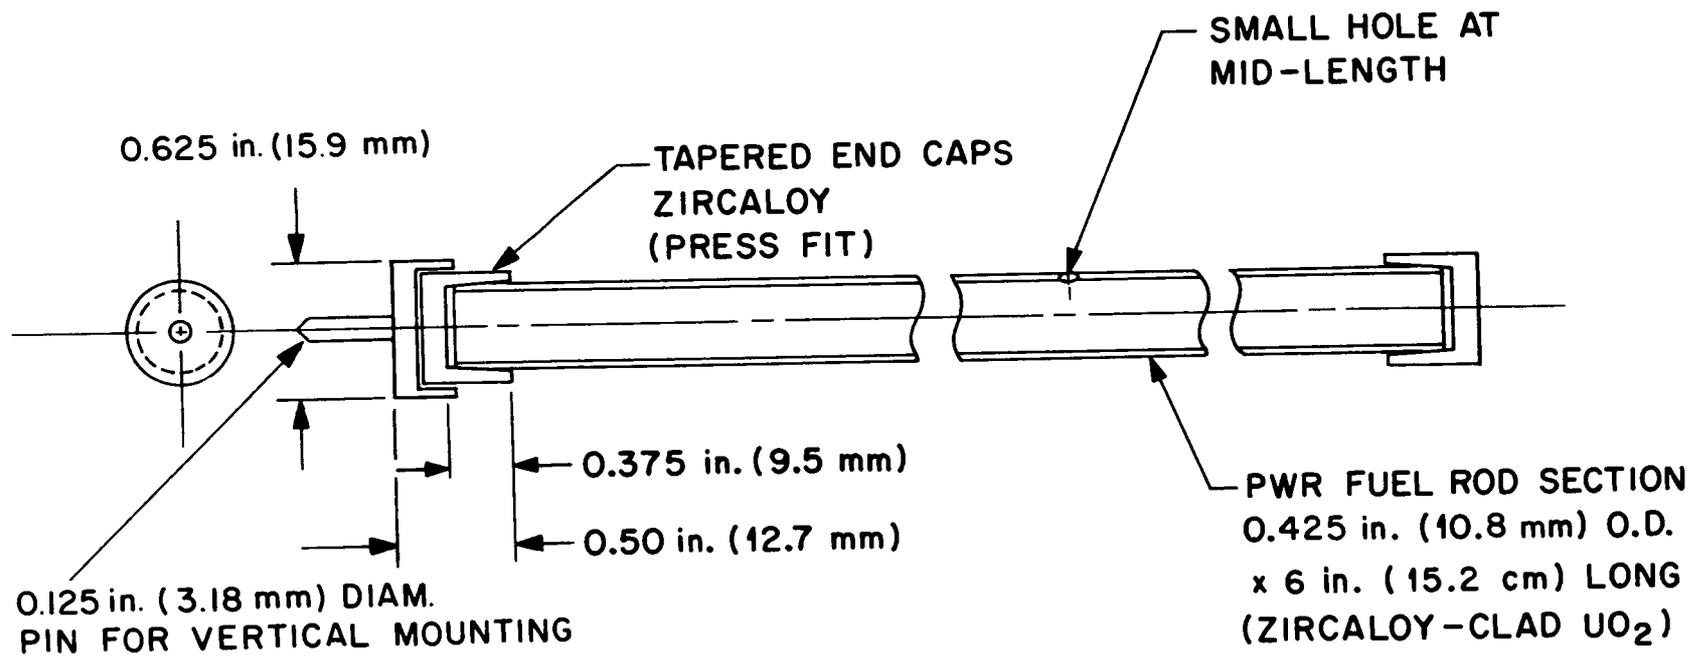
Dimensions of fuel specimen heated in test VI-1.
